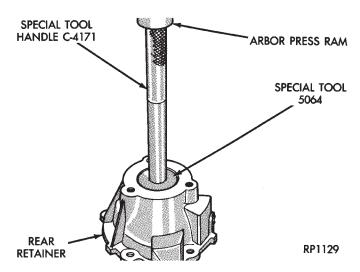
Installing Mainshaft Rear Bearing In Rear Retainer
